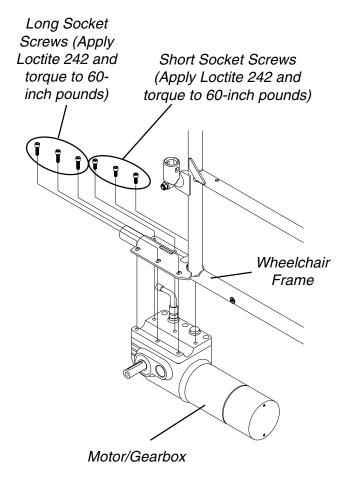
REPLACING THE MOTOR/GEARBOX
